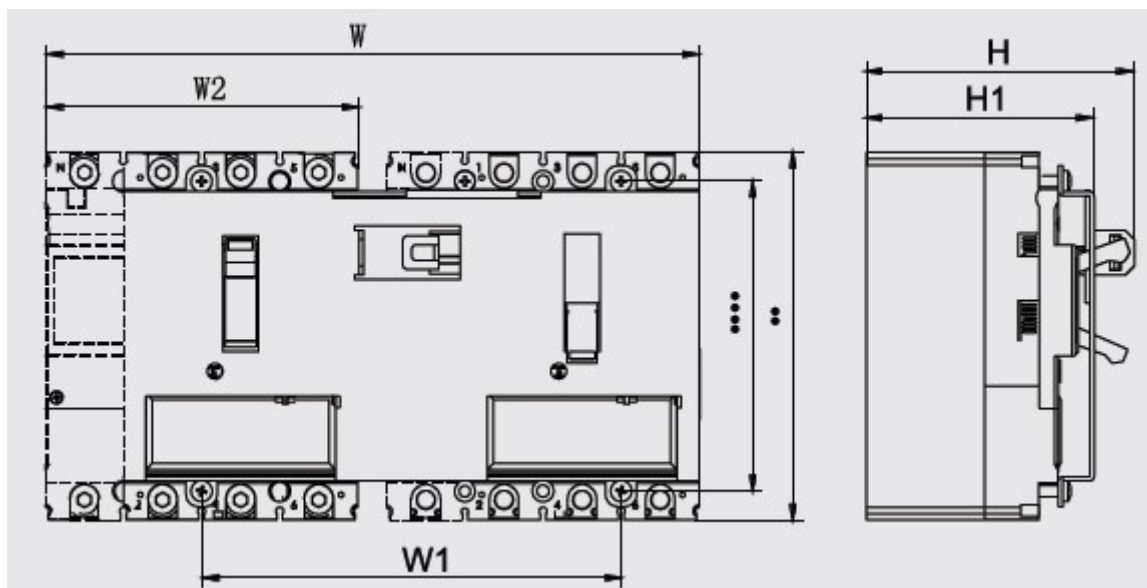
Outline dimension drawing of mechanical interlocking mechanism and circuit breaker after installation
